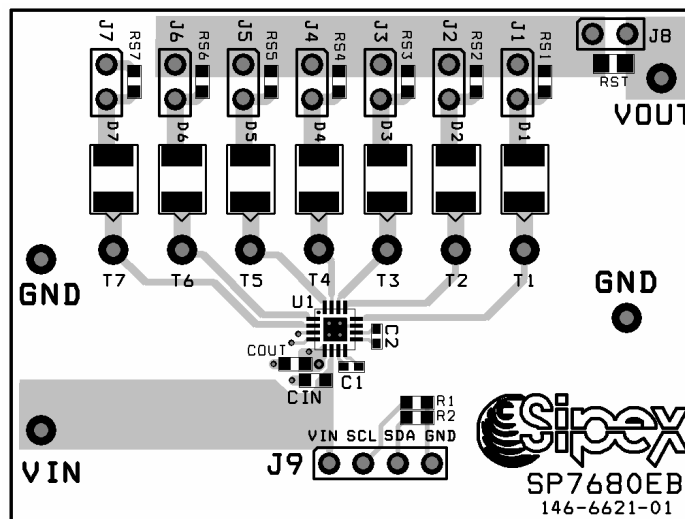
SP7680EB component Placement & LAYOUT TOP SIDE
